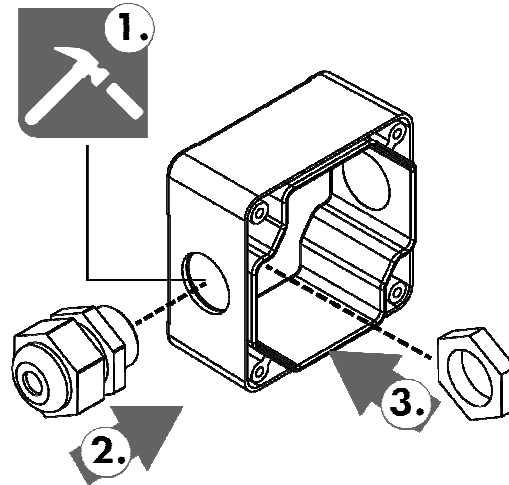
Mounting of cable gland (respect the tightening torque of the cable gland!)
